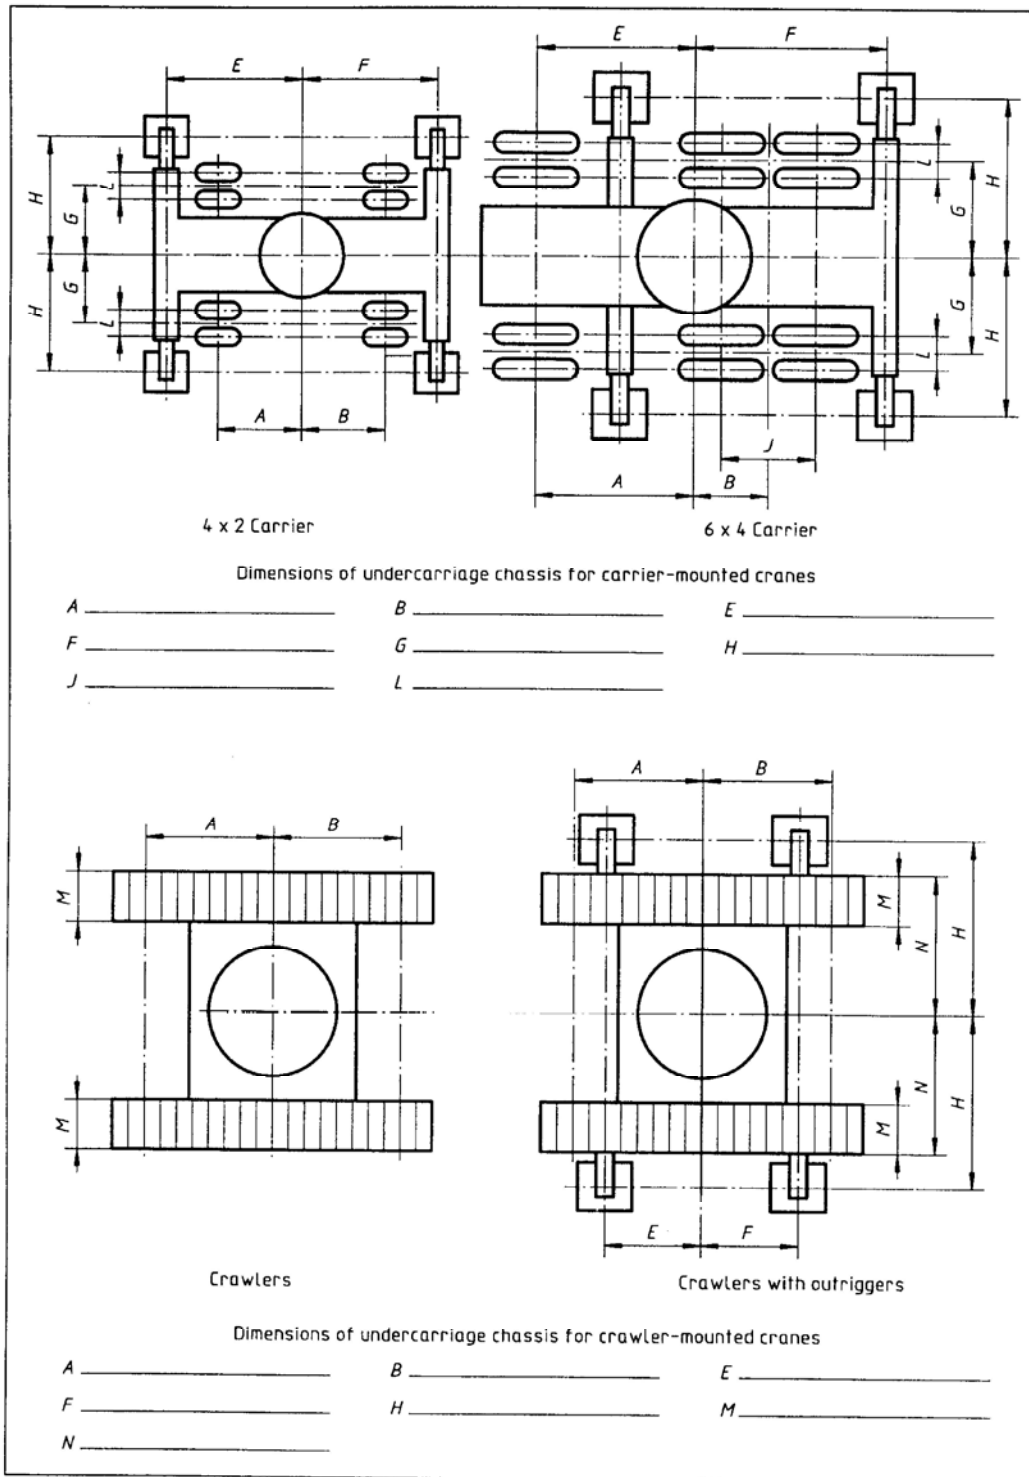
Data sheet for physical dimensions of undercarriage chassis for carrier-mounted and crawler-mounted cranes
